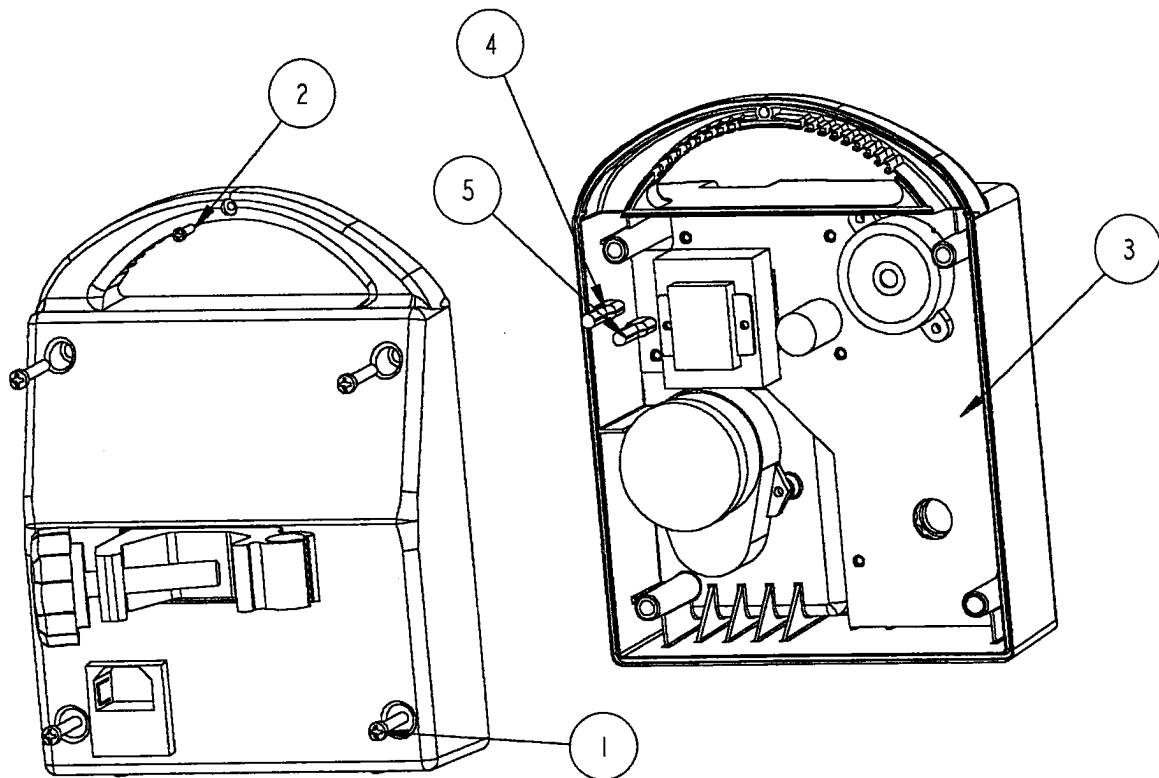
Separating Front and Rear Assemblies (220 VAC)
